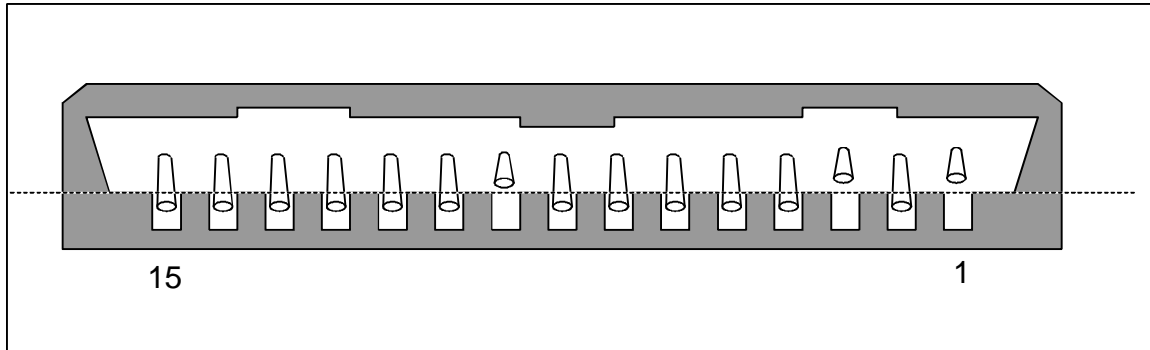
Bad Configuration Header (pins 1, 3 and 9)
